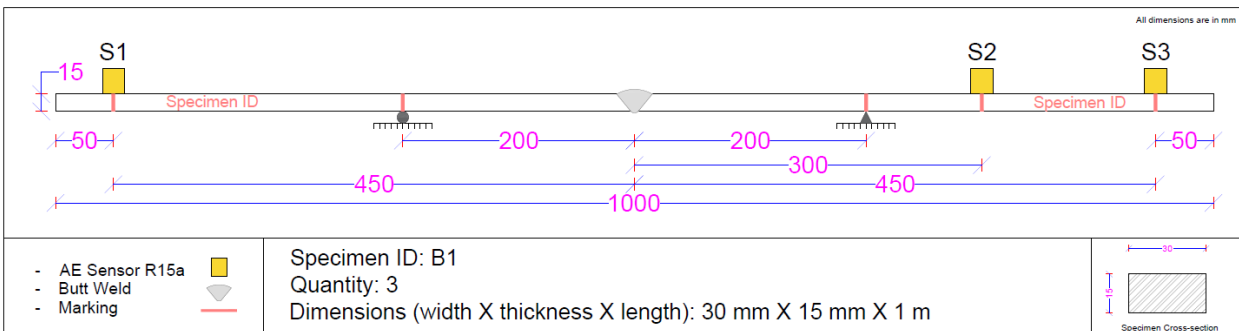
Specimen B1 marking and sensors location from the centre of the weld
